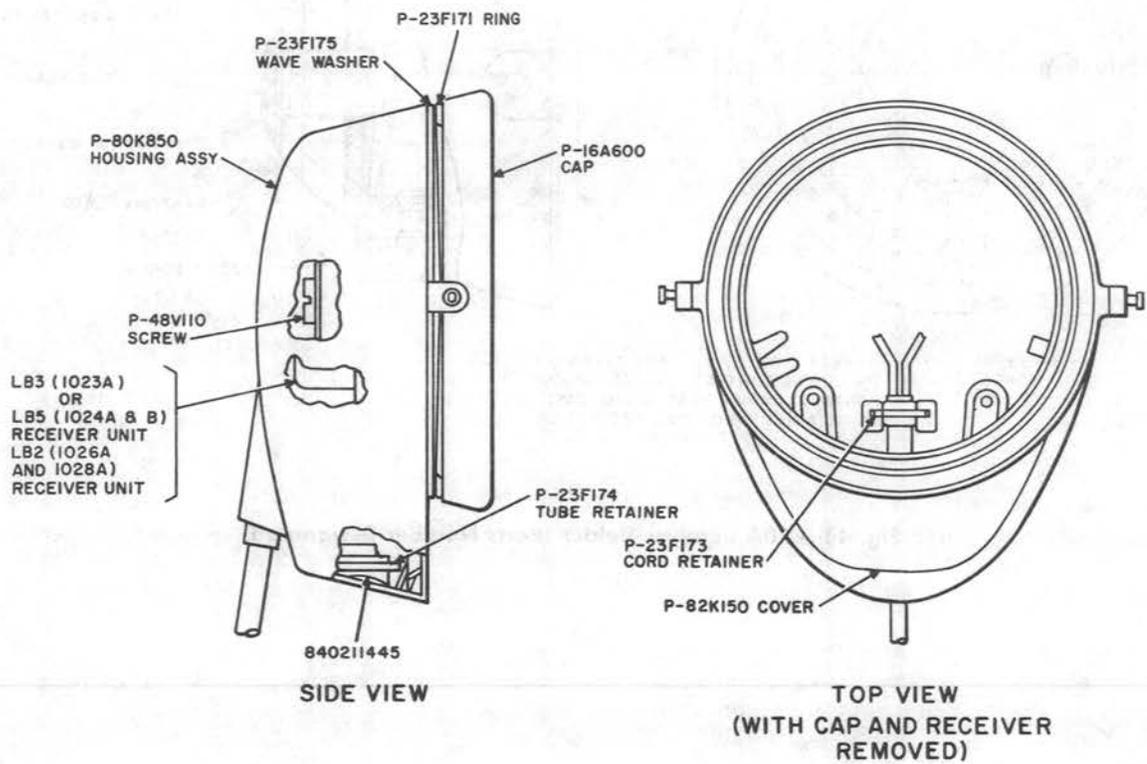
Housing Assembly, Cap, and Receiver Unit
